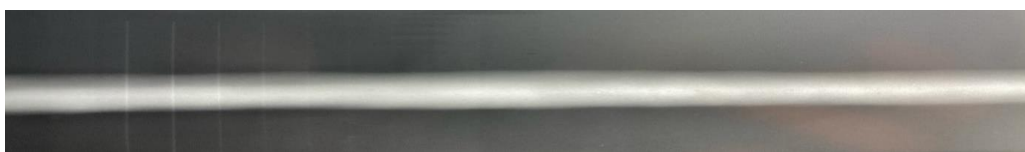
Correctly made joint after welding with micro-jet cooling.
